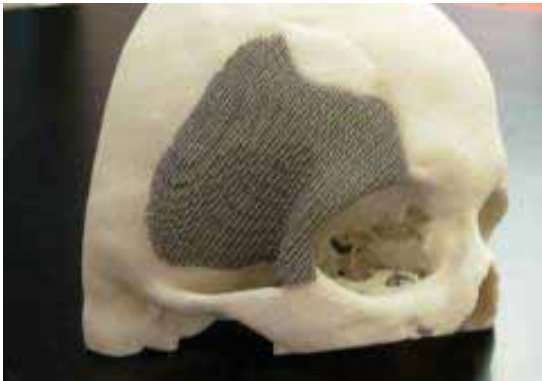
Direct Medical implant manufactured using ARCAM Electron Beam Melting
